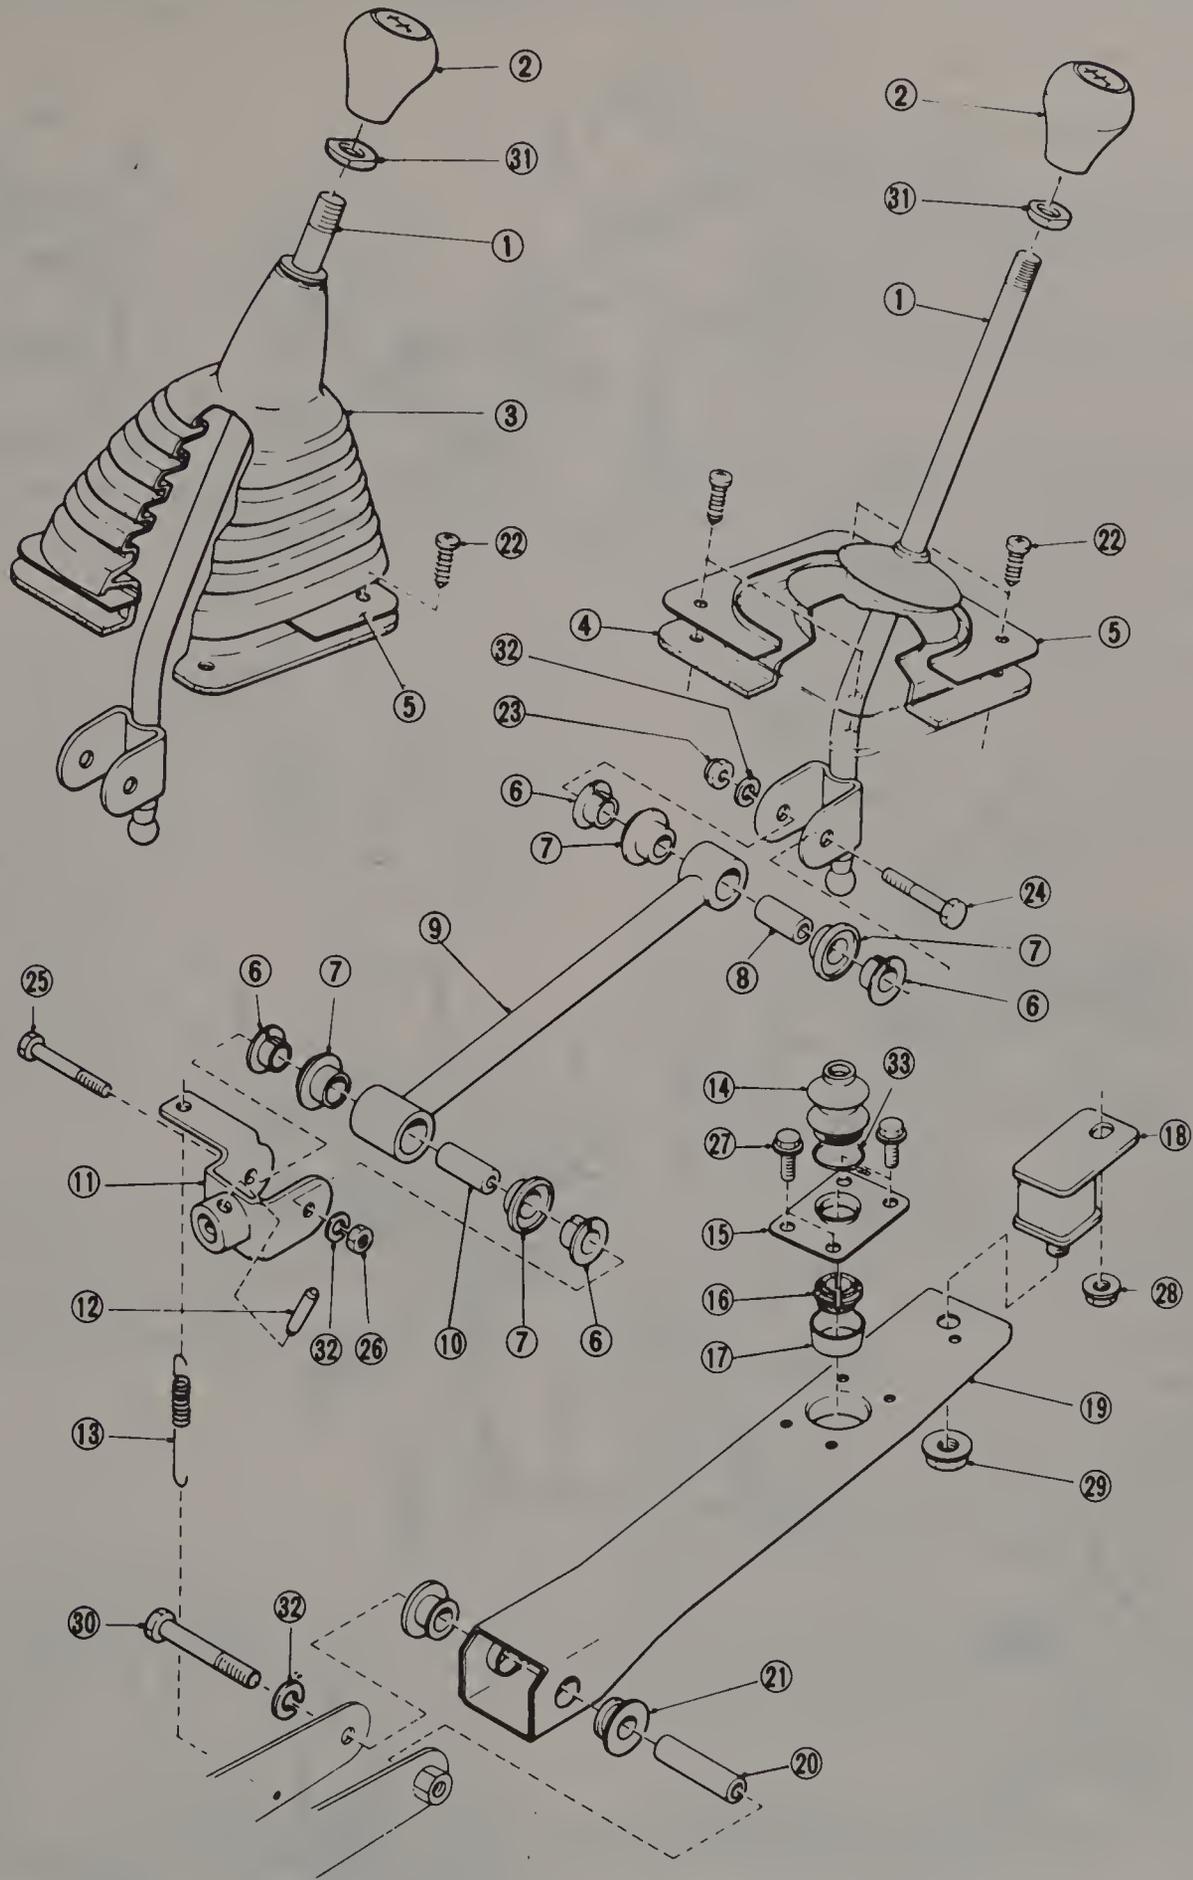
Manual transmission shifter components (2WD) – exploded view (Sec 4)
